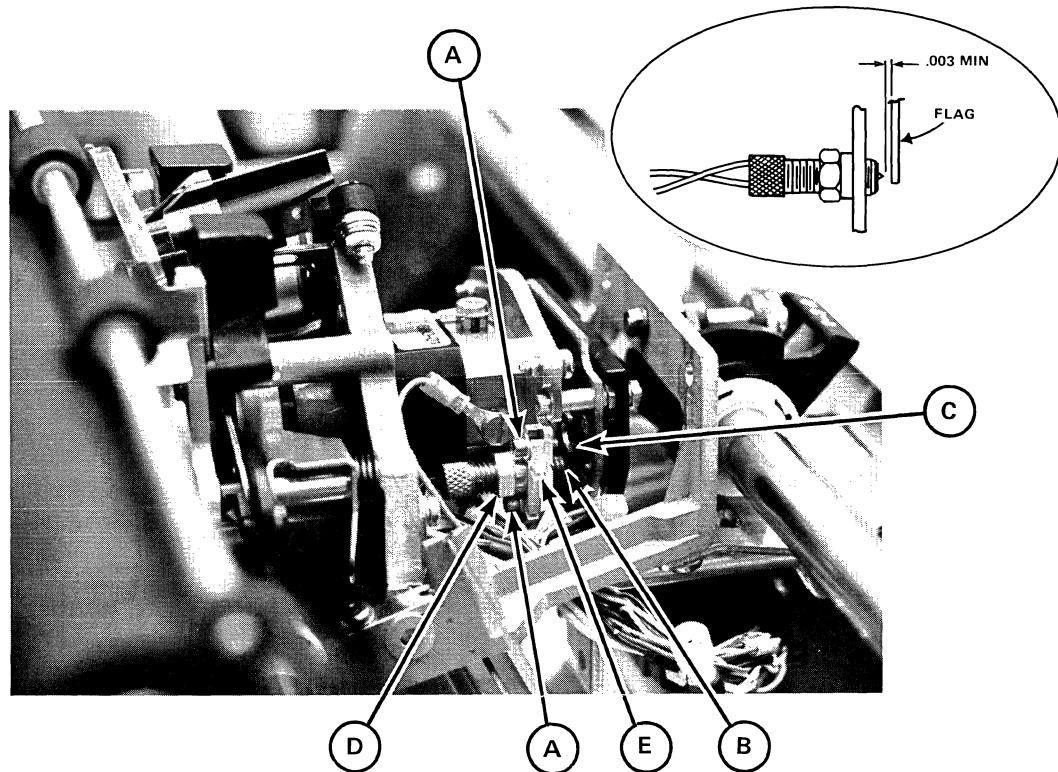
PRINT WHEEL HOME ALIGNMENT (ECS Carriage)
